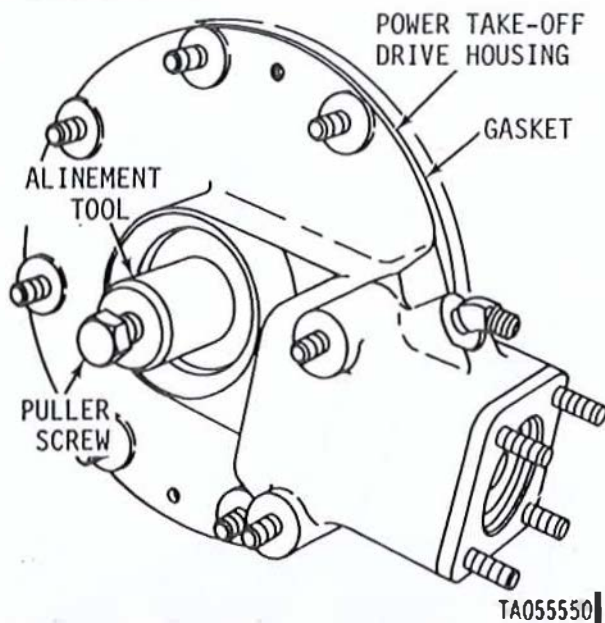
Installing power takeoff drive housing using alignment tool, model AVDS-1790-2DR engine.
